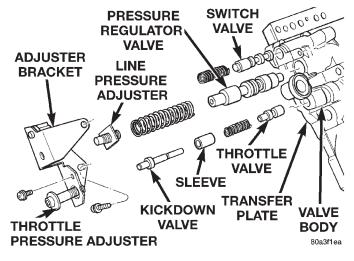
Adjusting Screw Bracket, Springs, Valve Removal
